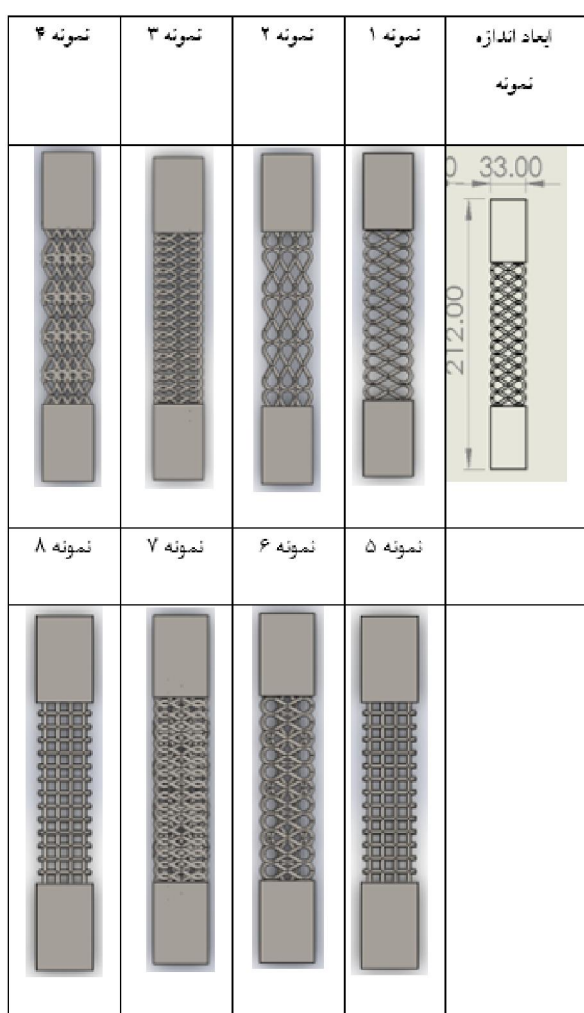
Images and dimensions of printed samples for tensile test in a single layer and double layer
